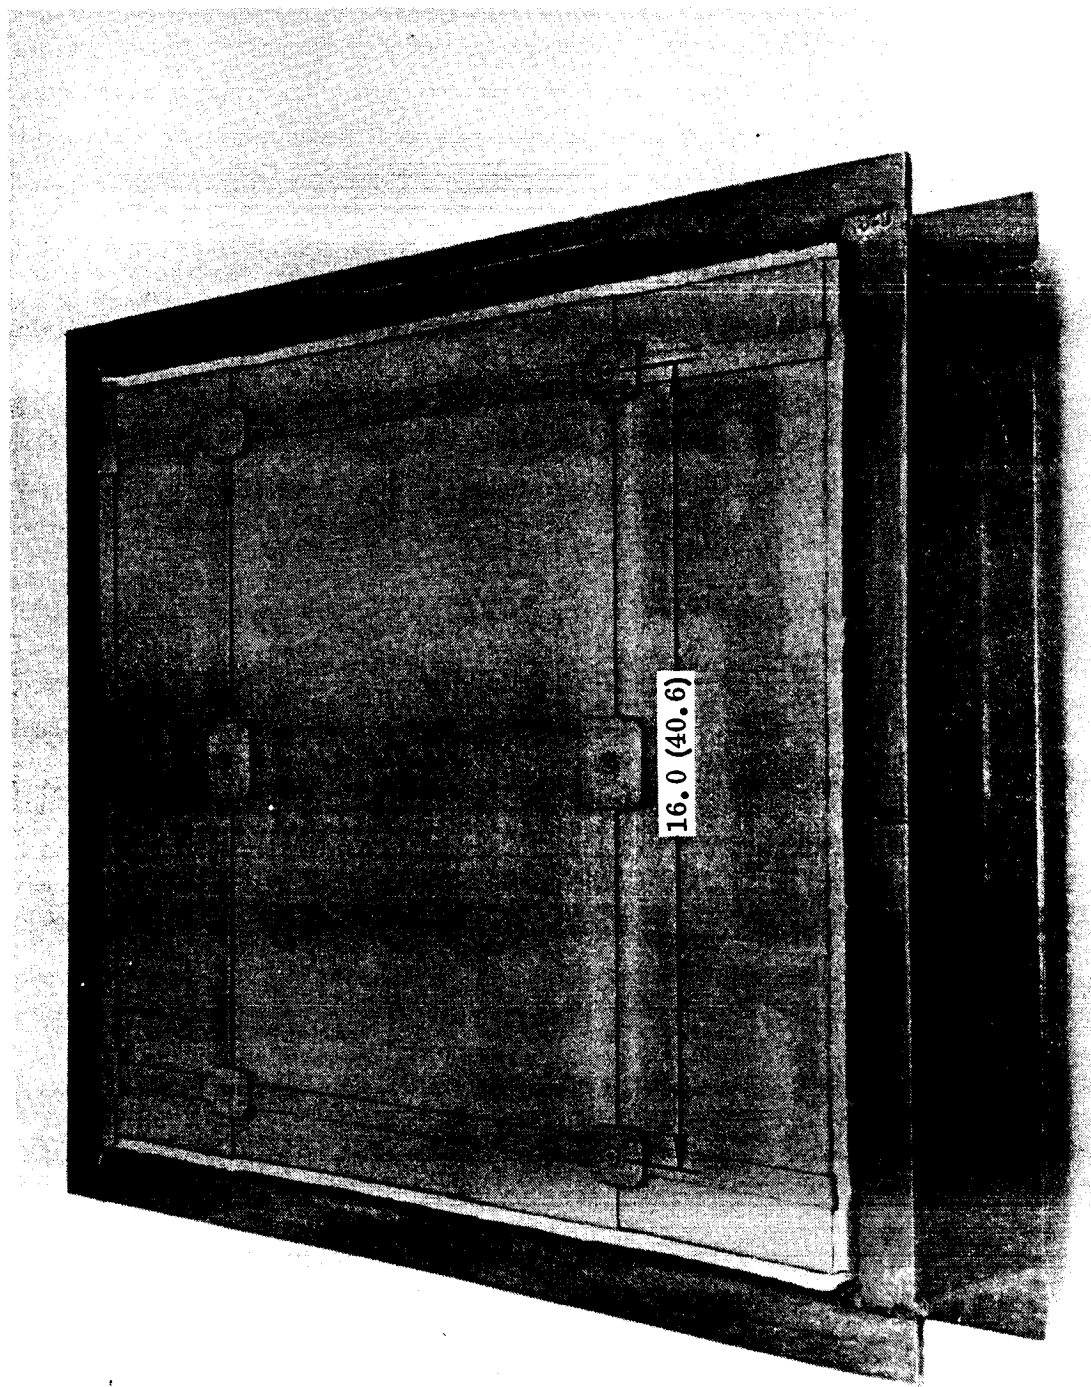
Unexposed Tee-Stiffened TPS Specimen -- End View (Photo 130328B)
